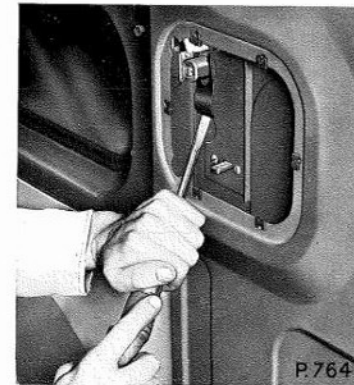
Refitting the sliding door barrel lock retaining clip
